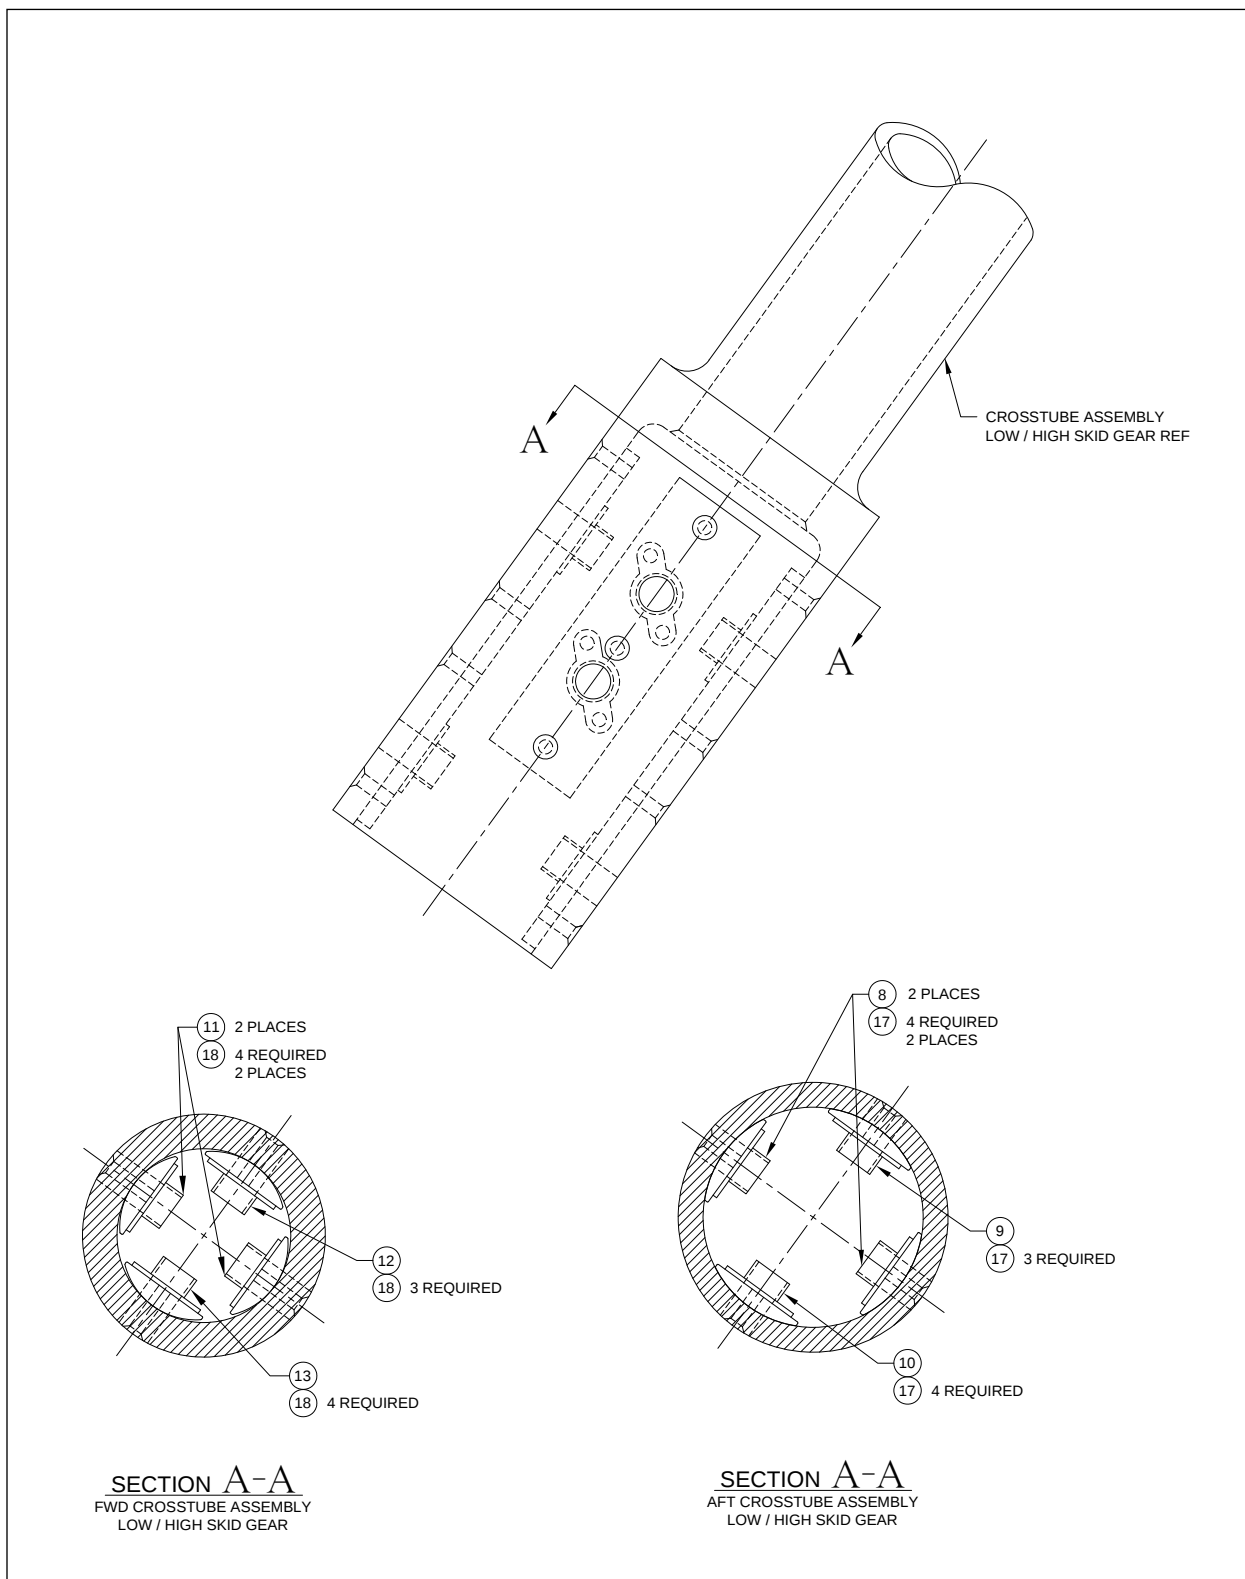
CROSSTUBE ASSEMBLY BOSS (SADDLE), PLATE ASSEMBLIES
